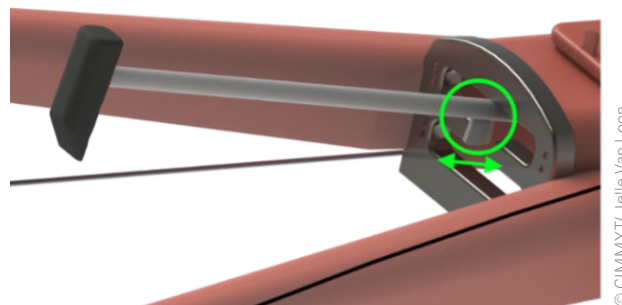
Gearbox representation with gear shift in high gear set position (tongue lifted out of the gearbox), ready to engage. For selecting low gears, the gear shift should be pushed until the tongue is in an inserted position.
